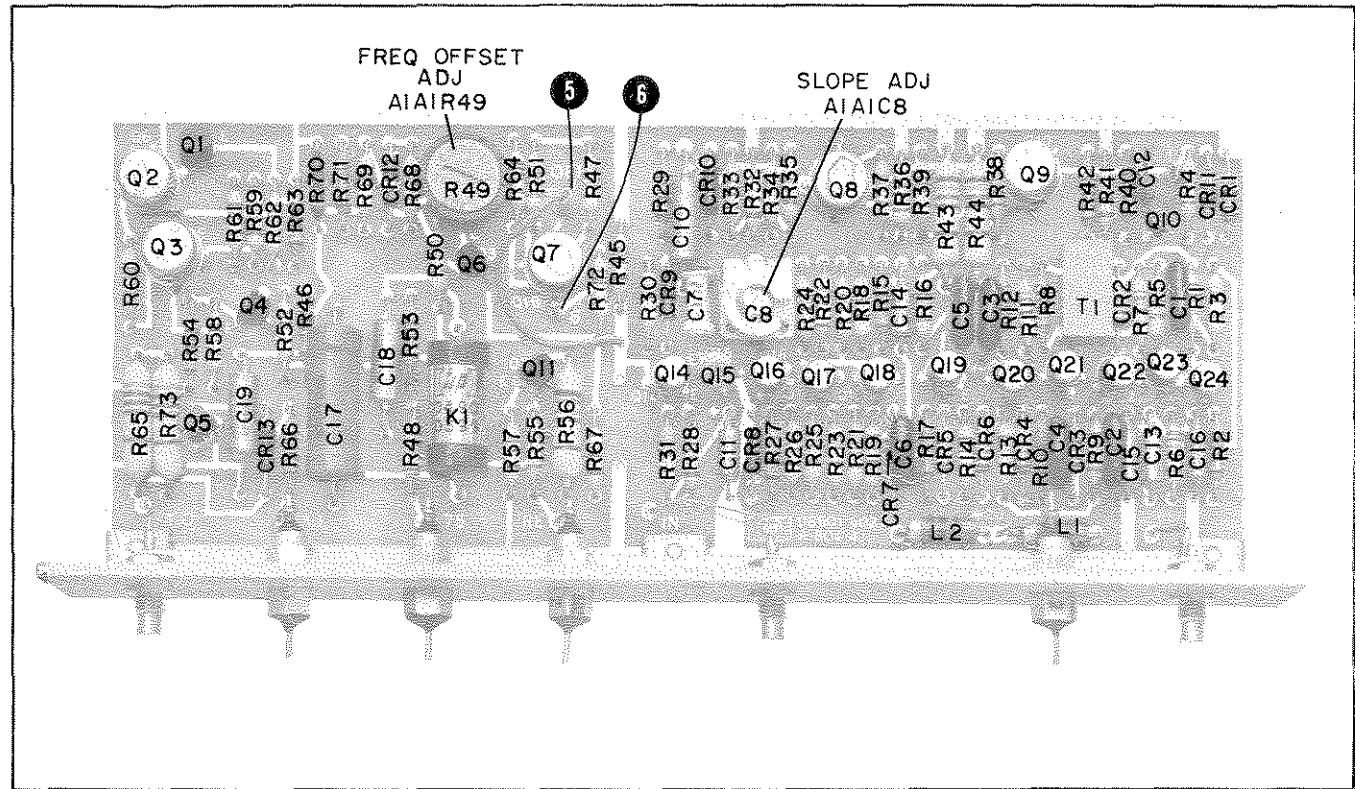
Component Identification, A1A1 Discriminator Assembly
